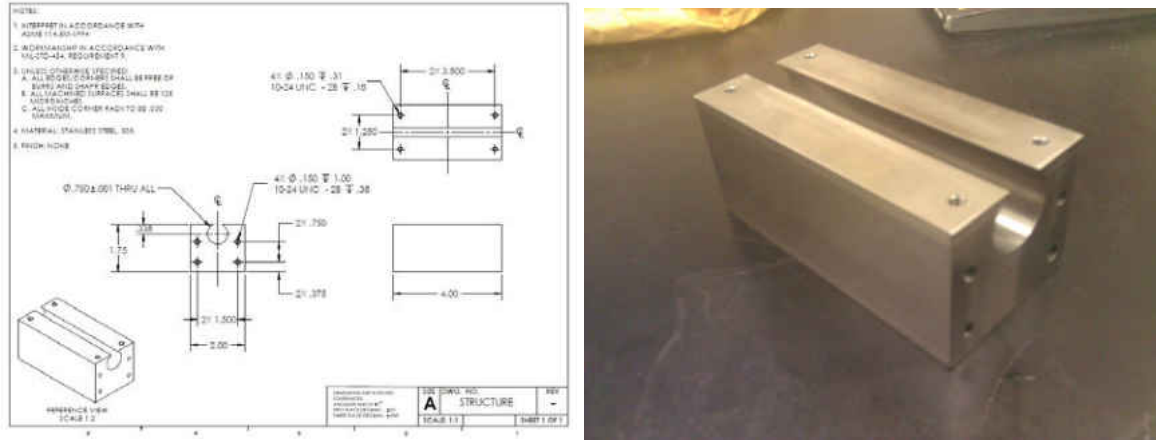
Structure/combustion chamber dimension and tolerances, and final manufactured combustion chamber part.
